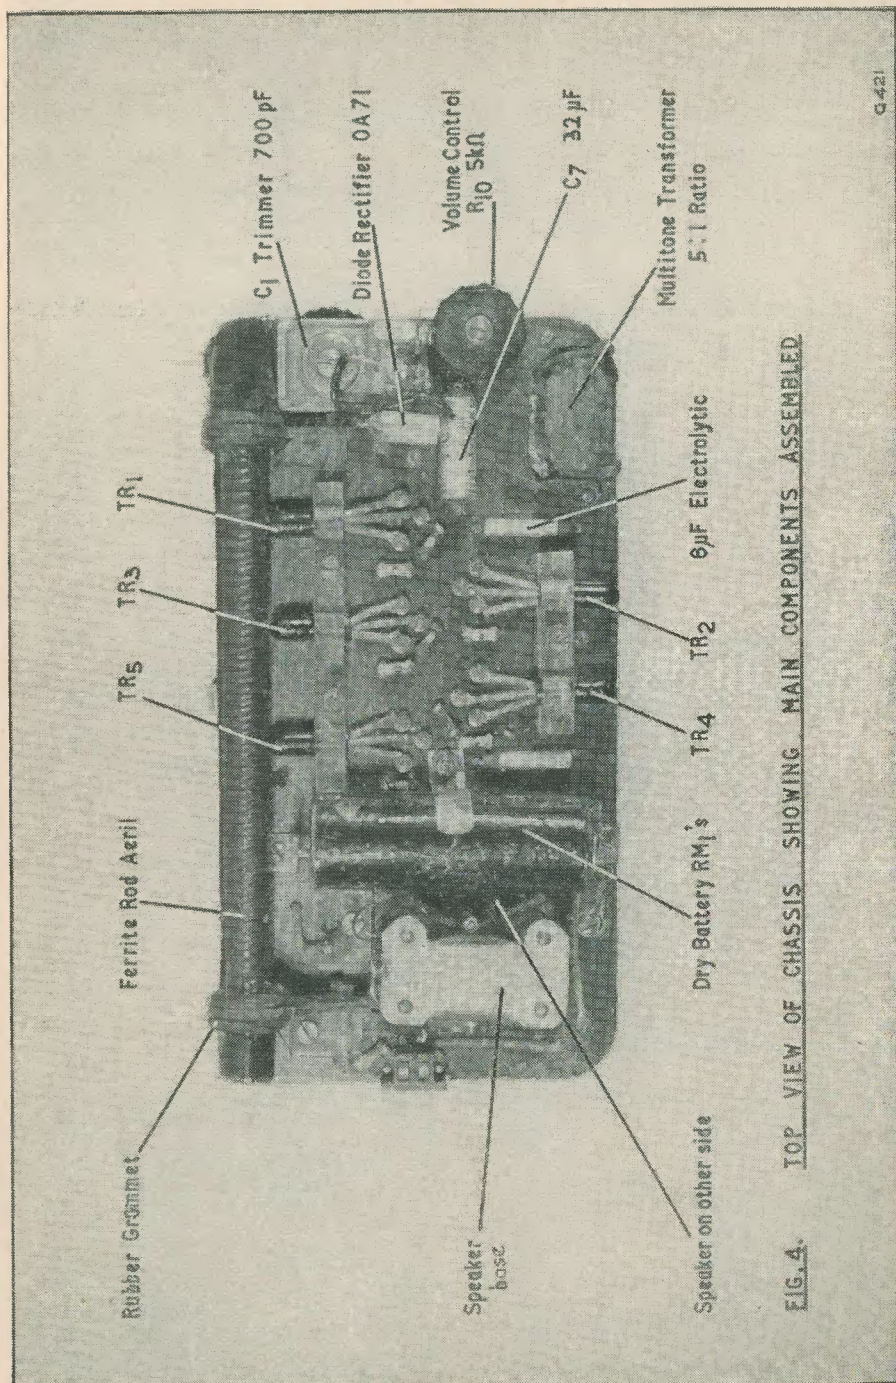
TOP VIEW OF CHASSIS SHOWING MAIN COMPONENTS ASSEMBLED
